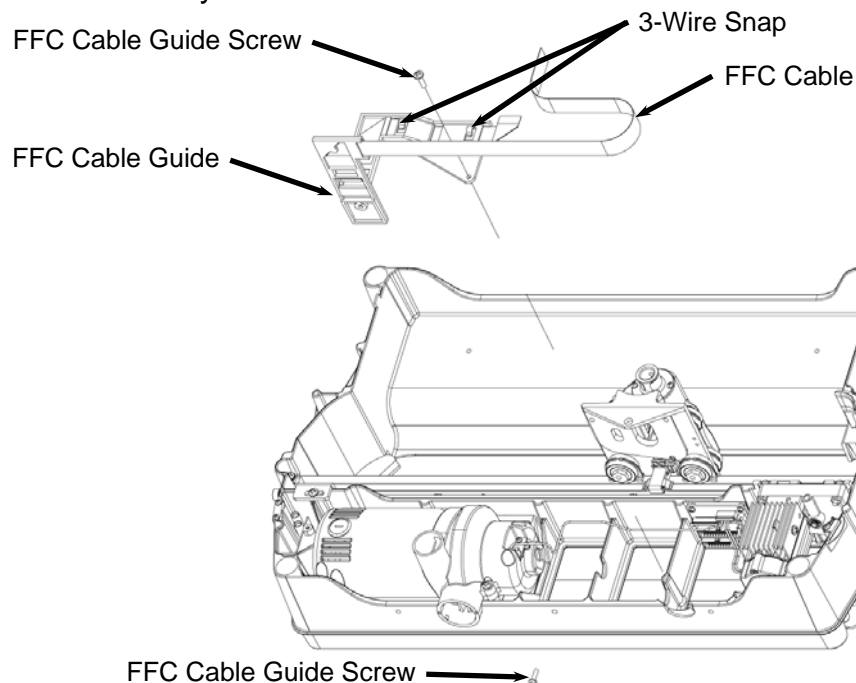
VIEW OF THE Z-MOTOR PACK ELECTRONICS
